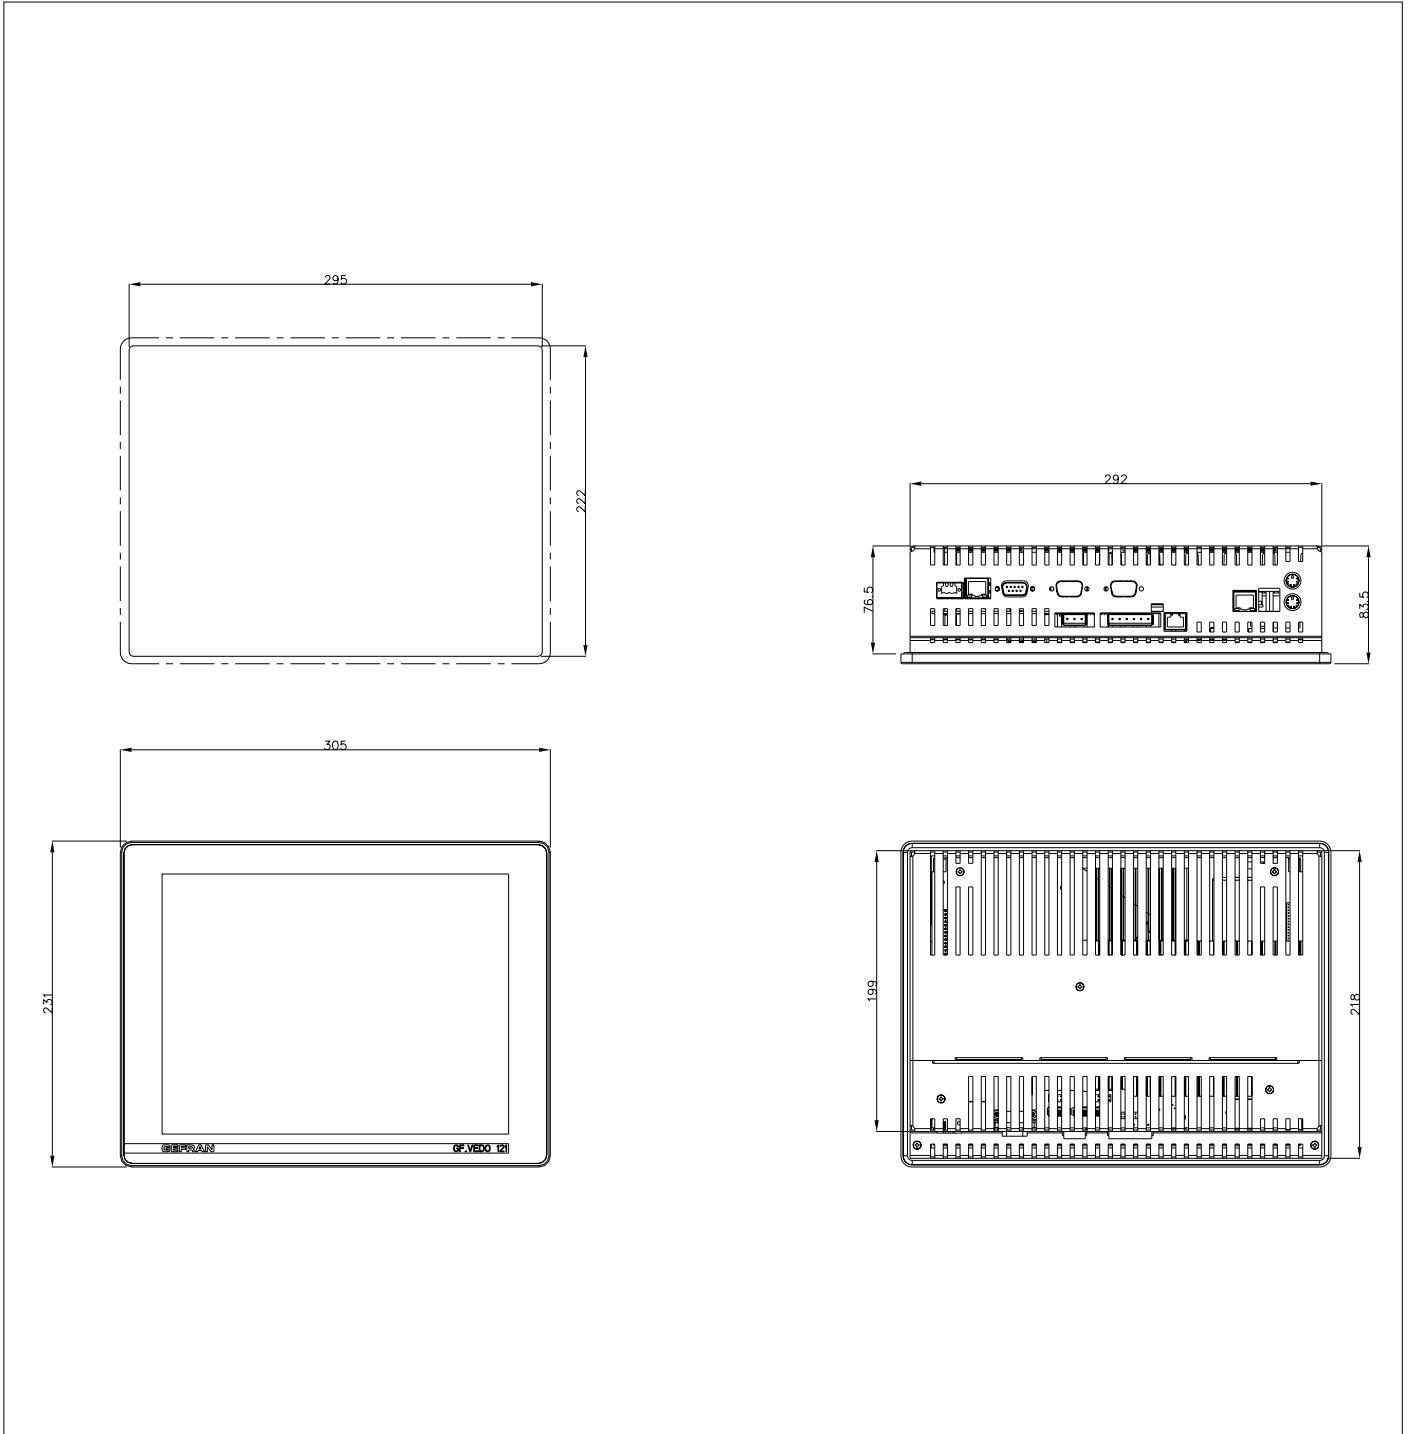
Dimensions and cut-out GF\_VEDO HL 121CT
